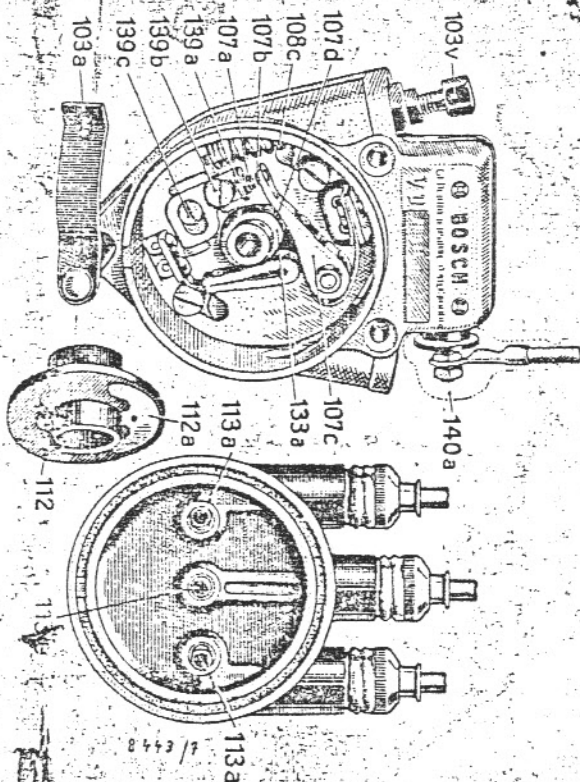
Contact breaker VU2D (for twin cylinder engines) distributor disc and rotor removed
